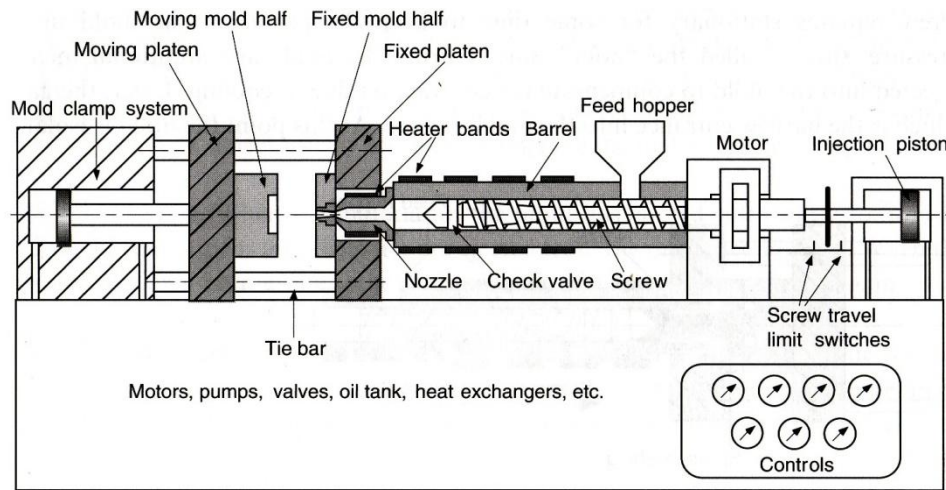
Schematic diagram of a typical injection moulding machine [29].
